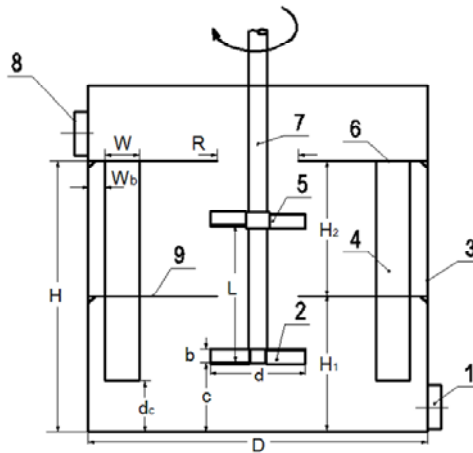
Schematic diagram of two-stage compulsory-stirred tank. 1 – Feed inlet; 2 – Lower impeller; 3 – Mixing tank; 4 – Baffle; 5 – Upper impeller; 6 – Upper ring-plate; 7 – Stirring shaft; 8 – Discharge port; 9 – Low ring-plate
